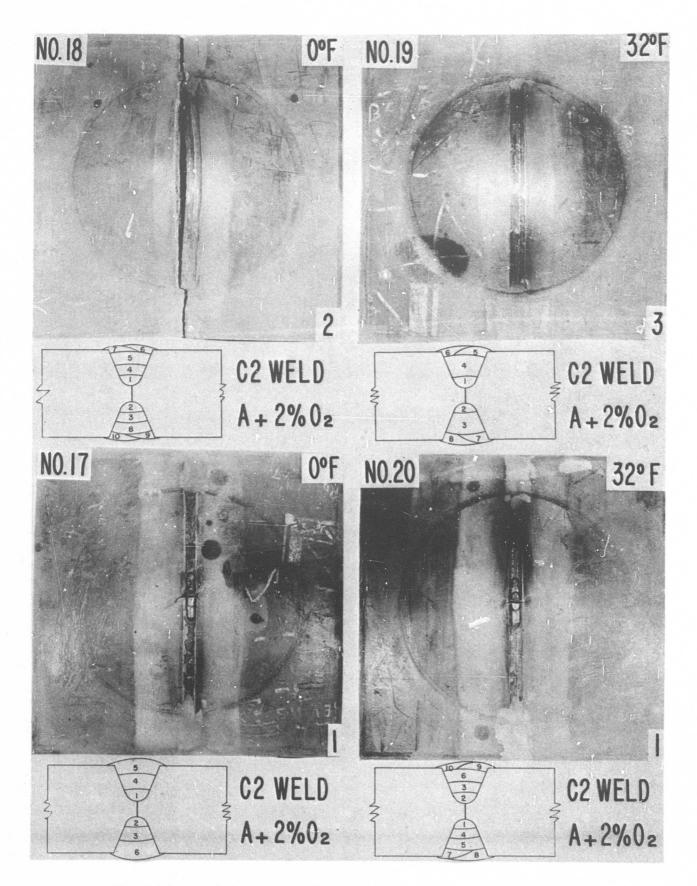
Explosion-bulge test fracture characteristics of inert-gas-shielded metal-arc weldments. Bottom weldments modified with crack-starter weld.
